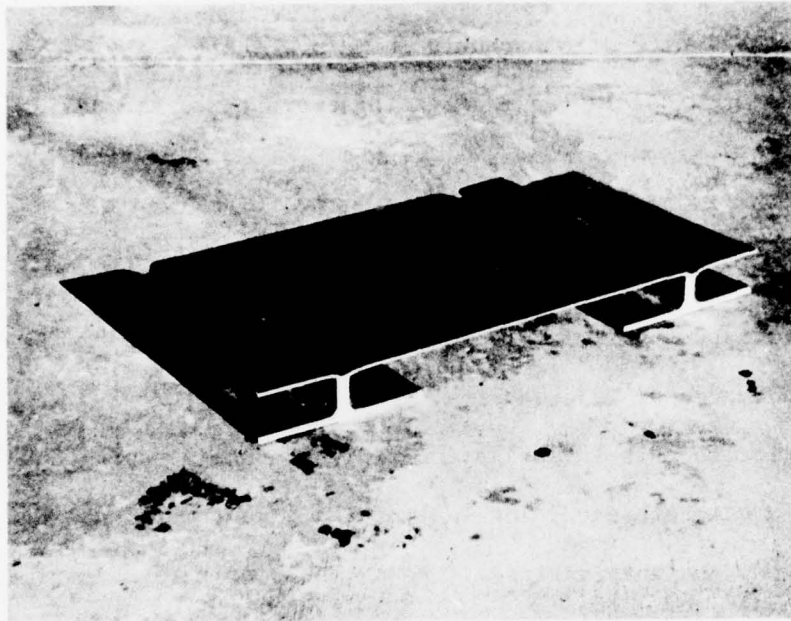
Structural Decking Formed Using the "T" Weld Configuration
